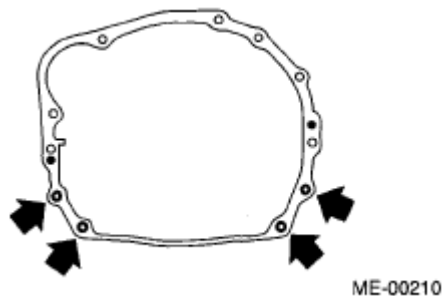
Locating Lower Side Of Transmission To Engine Nuts Location
